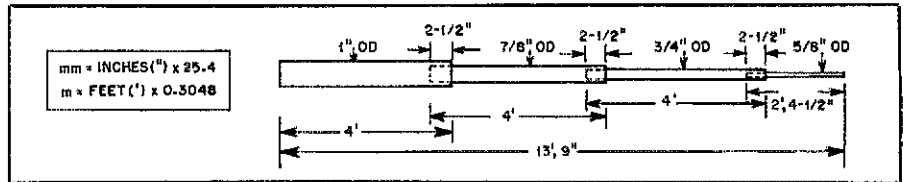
Details of the antenna-arm construction. No. 6 machine screws are used to hold the tubing together.
